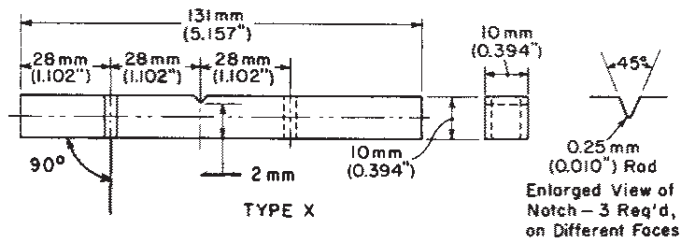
Charpy (Simple Beam) Impact Test Specimens for Metal Powder Structural Parts
